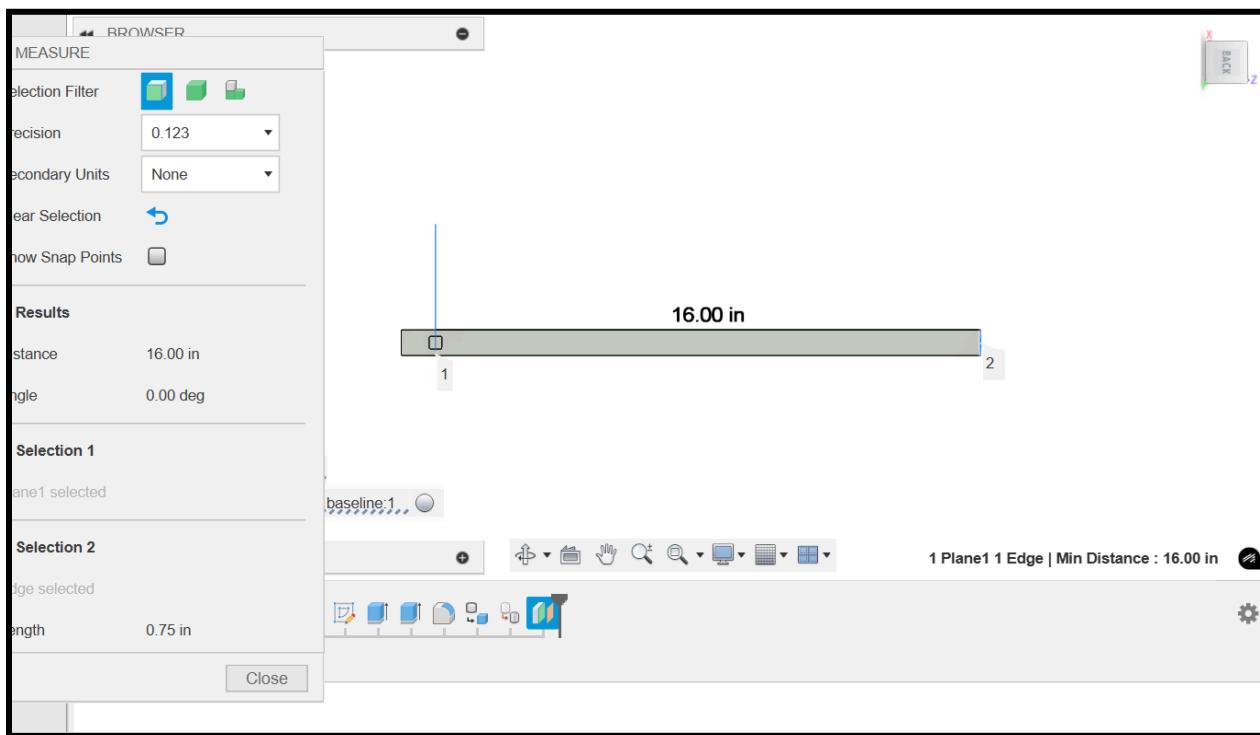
CAD Dimension L=16" (length from drive to where load is applied).
